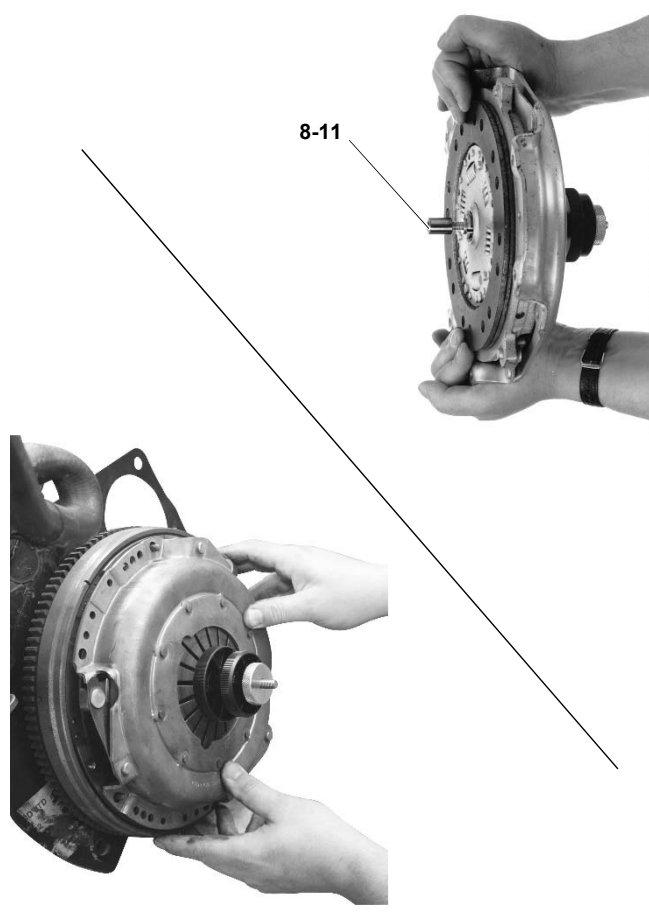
Mounting the pressure plate with clutch disc to flywheel in accordance with the manufacturer's instructions.
